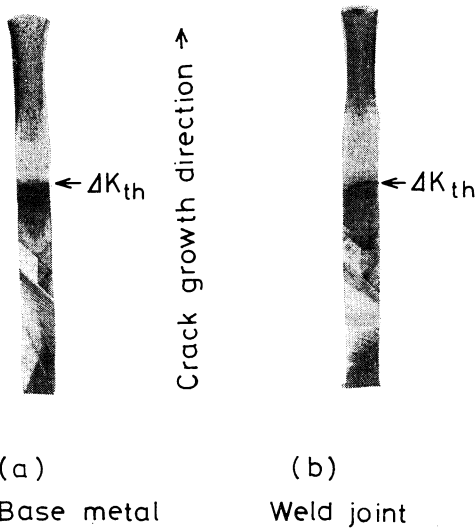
Fracture surface of CT specimen ( $B=6$  mm, weld joint).
